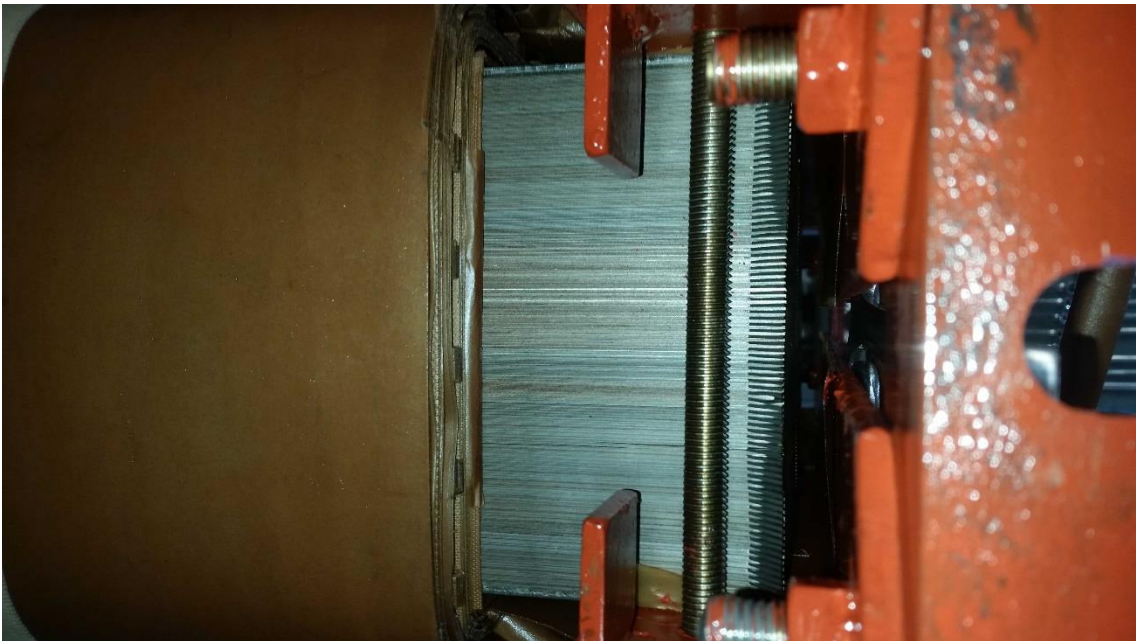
East side windings outer coil packer void after removal. Core clamping structure loosened and shifted upwards.
